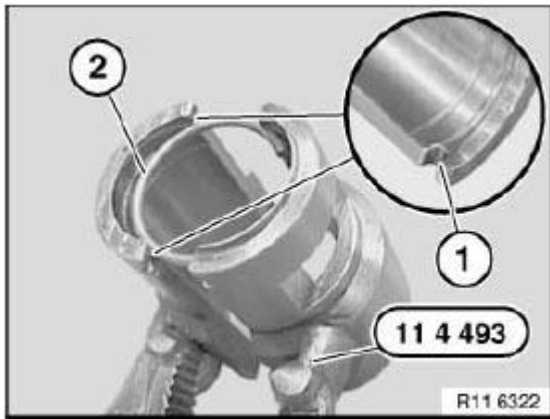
Inserting Piston Pin Circlip Into Groove With Special Tool (11 4 493)
